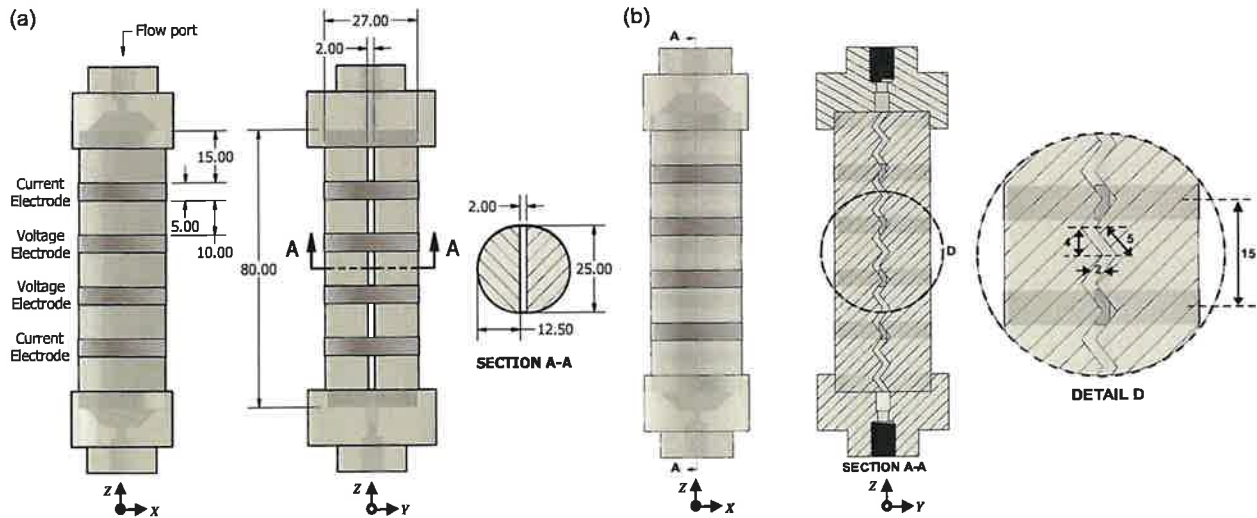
Schematic drawings of 3D printed fractures: (a) Parallel-smooth; (b) Sawtooth in the Y-Z plane (Tortuous in Y). All dimensions are in mm.
